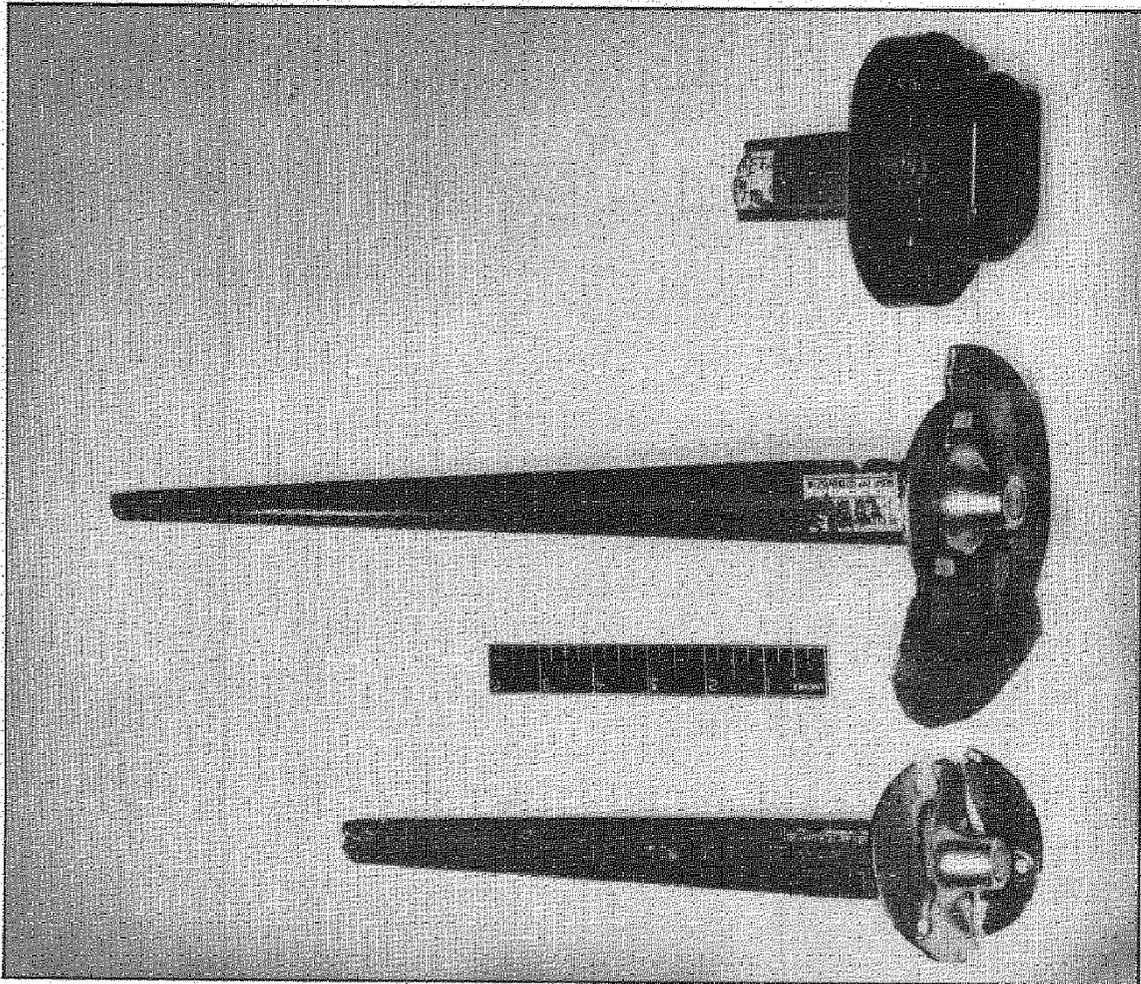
TYPICAL EXAMPLES OF BLADE AERIAL FAILURES
